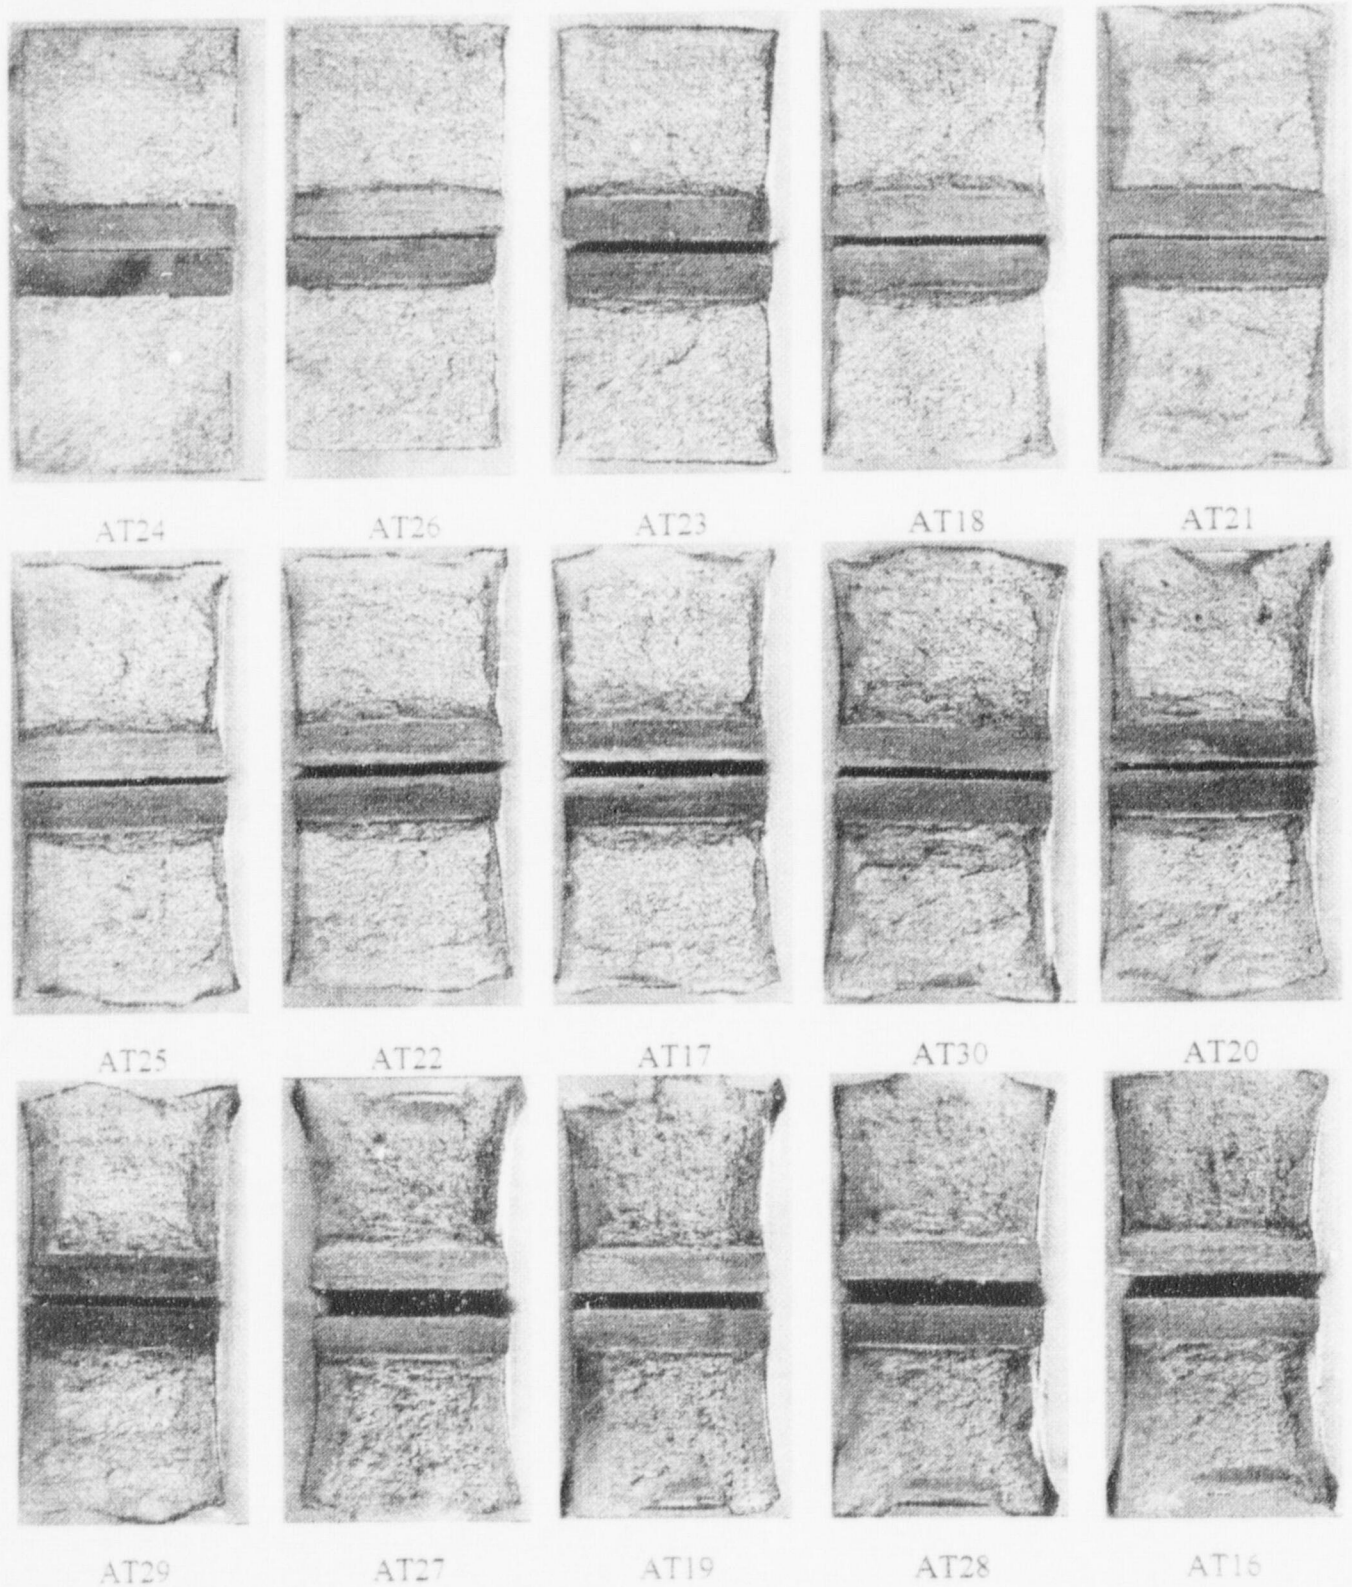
Charpy Impact Specimen Fracture Surfaces for Vogtle Unit 1 Reactor Vessel Intermediate Shell Plate B8805-3 (Transverse Orientation)
